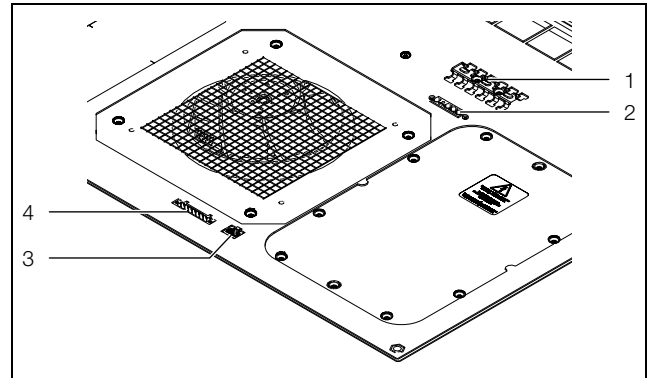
Fasteners at the bottom of the roof-mounted cooling unit
